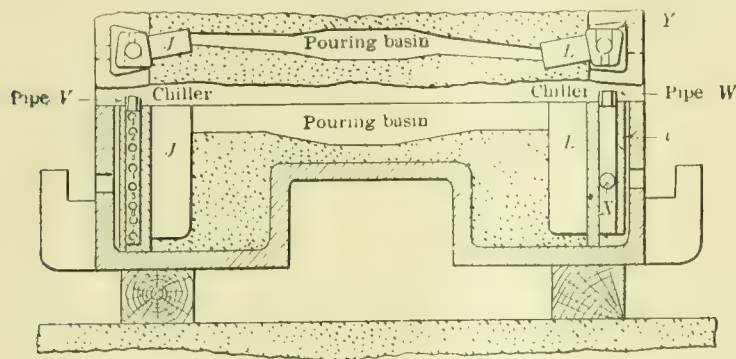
CHILLER MOULD FOR TESTING CHILLING EFFECT ON CASTINGS BY COOLING CHILLER.
